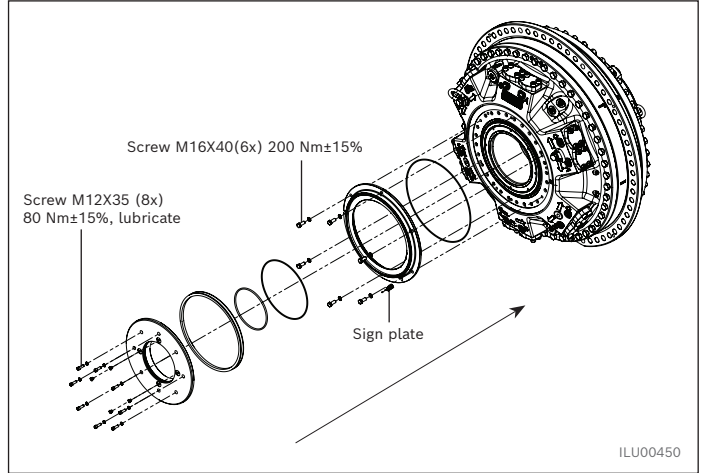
Outer ring, sign plate and SPDC magnetized bearing holder
